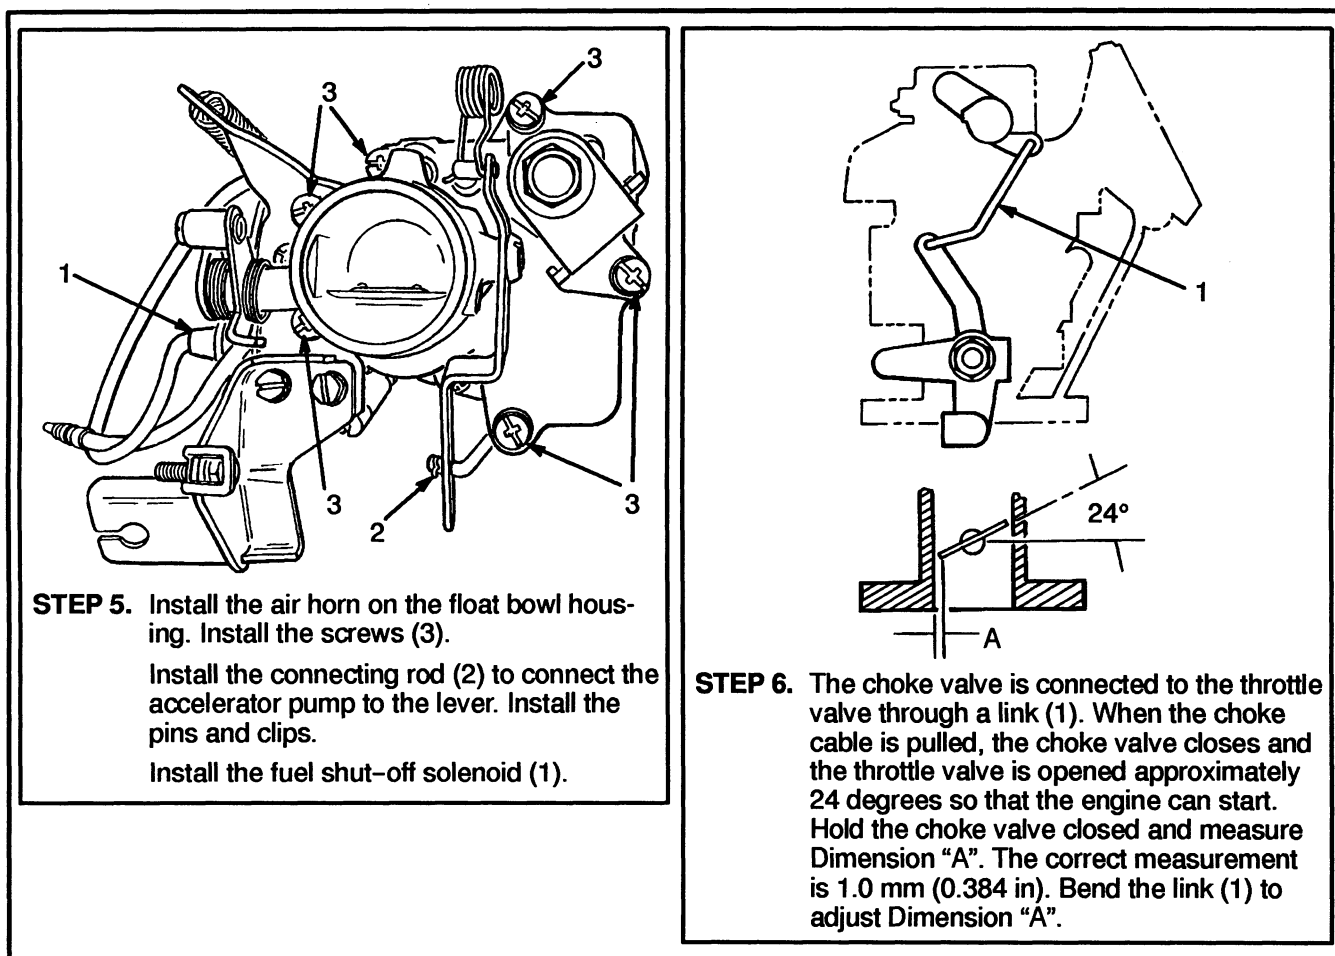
ASSEMBLY OF THE CARBURETOR (2 of 2)
